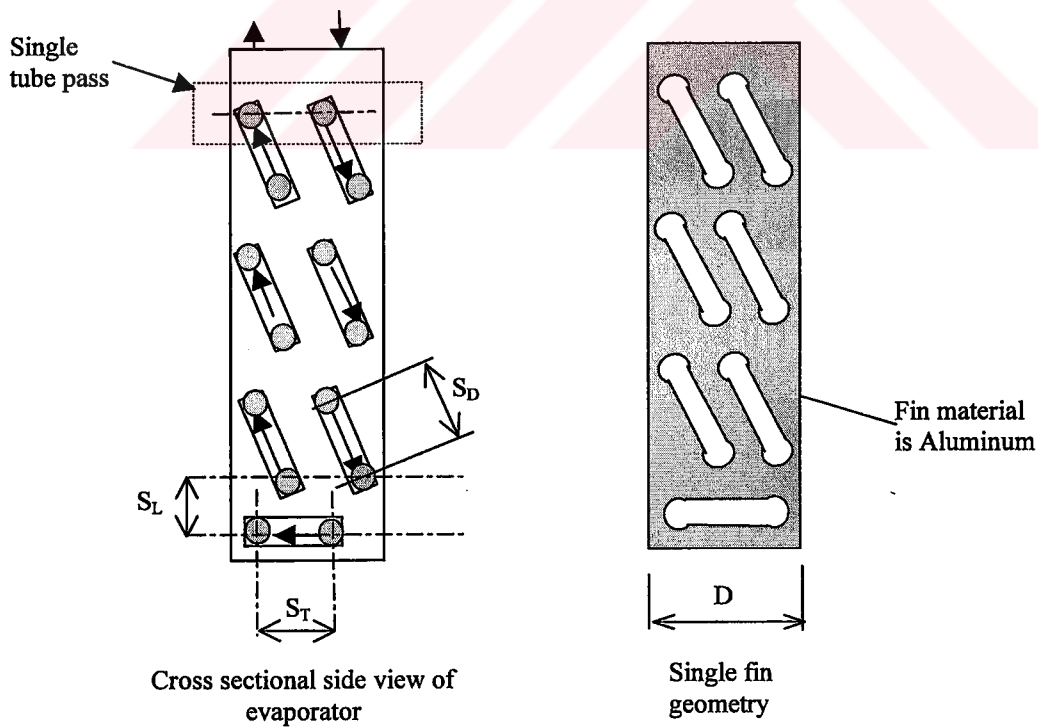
Cross-sectional view of evaporator and single fin geometry
